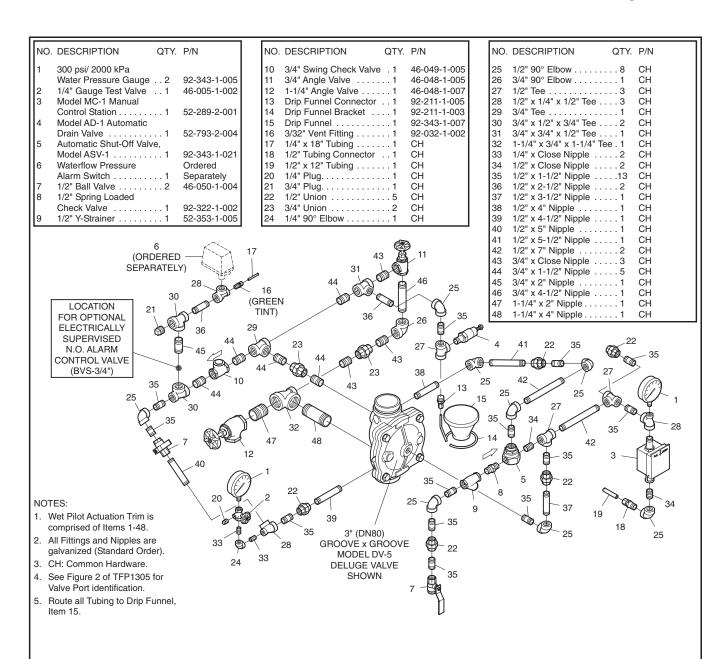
A — PART 2 OF 3 3 INCH (DN80) MODEL DV-5 DELUGE VALVES — EXPLODED VIEW OF VERTICAL WET PILOT ACTUATION TRIM (52-477-X-104) — Page 6 of 16 TFP1310
